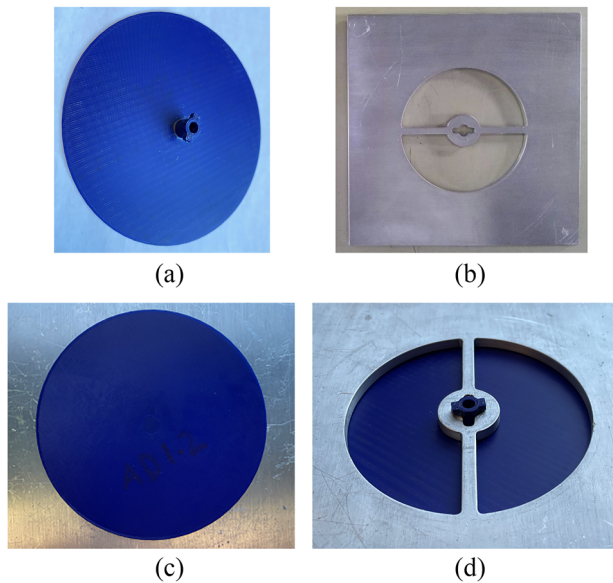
3D printed acoustic plate-valve sample and the mounting plate. (a) 3D printed acoustic plate-valve sample. (b) Mounting plate for acoustic plate-valve. (c) Mounted 3D printed acoustic plate-valve sample (Top view). (d) Mounted 3D printed acoustic plate-valve sample (Bottom view)
